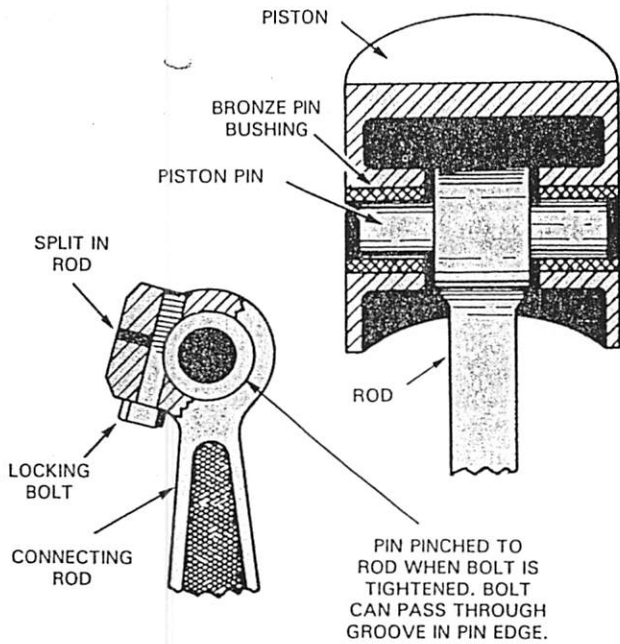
Piston pin locked to rod turns in bronze bushings.
